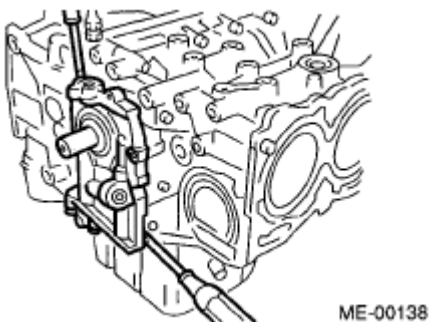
Removing Oil Pump From Cylinder Block Using Flat Tip Screwdriver
